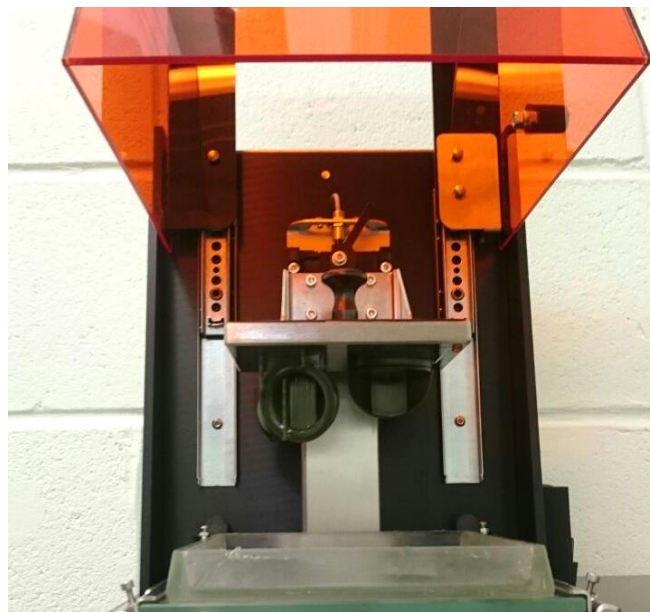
Photo of prototypes in EnvisionTEC® machine before removal
